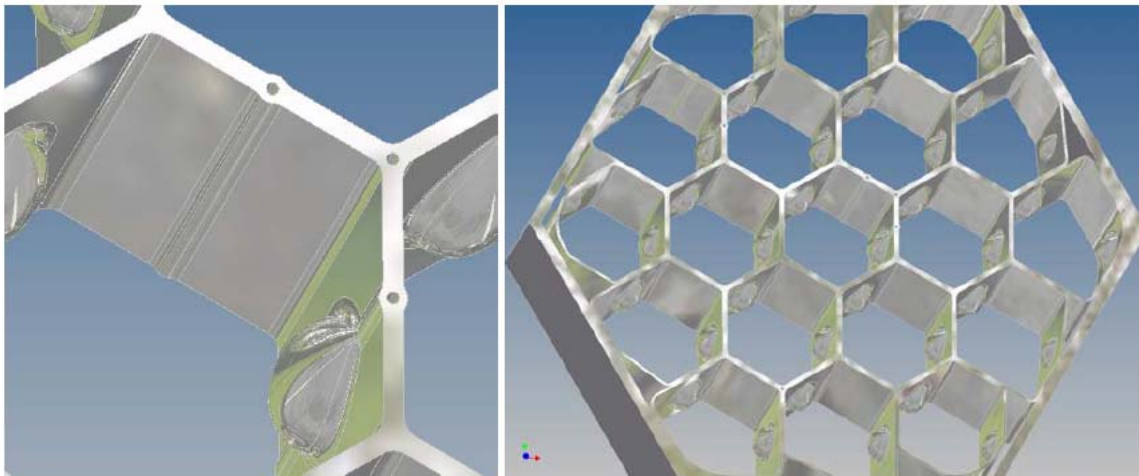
Design of used Spacer for equipment with thermocouples for the LBE rod bundle experiment ( $p/d=1.47$ ,  $d=8.2\text{mm}$ , small holes on left figure are installed with thermocouples)
